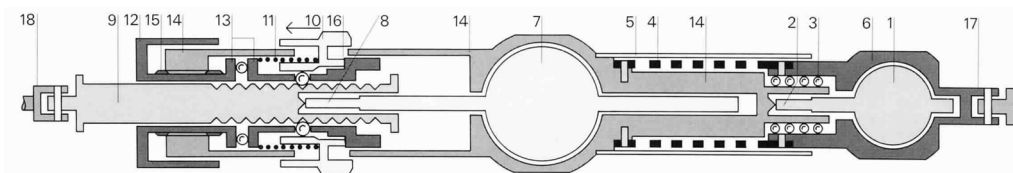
Scheme of a distometer: 1 Dial gauge to measure the spring extension; 2 Transducer; 3 Axial ball bearing; 4 Precision steel spring; 5 Protective tube; 6 Connection between dial gauge and precision steel spring; 7 Dial gauge for length measurement; 8 Transducer; 9 Drag-bar with notches for coarse movements; 10 Ring to release the notch; 11 Pressure spring to press the ring 10 at the notch 16; 12 Turning ring for fine adjustment of drag-bar; 13 Ball bearing; 14 Instrument body; 15 Clamping nut; 16 Notch; 17, 18 Couplings
